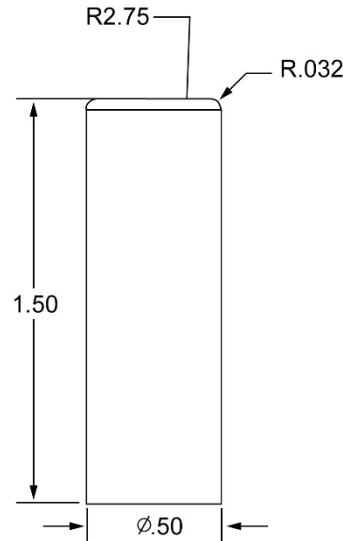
Sample small panel projectile. Length and diameter vary depending on test specimen thickness and material. Dimensions in inches.
